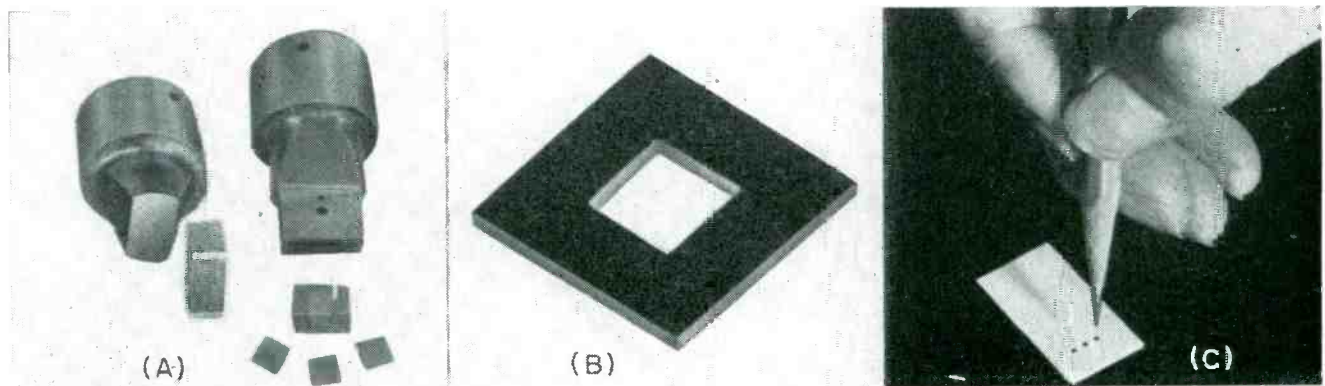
Tool for slicing quartz crystals showing quartz boule and wafers (A) machined ferrite core (B) and ceramic-spacer holes cut to close tolerances (C)
